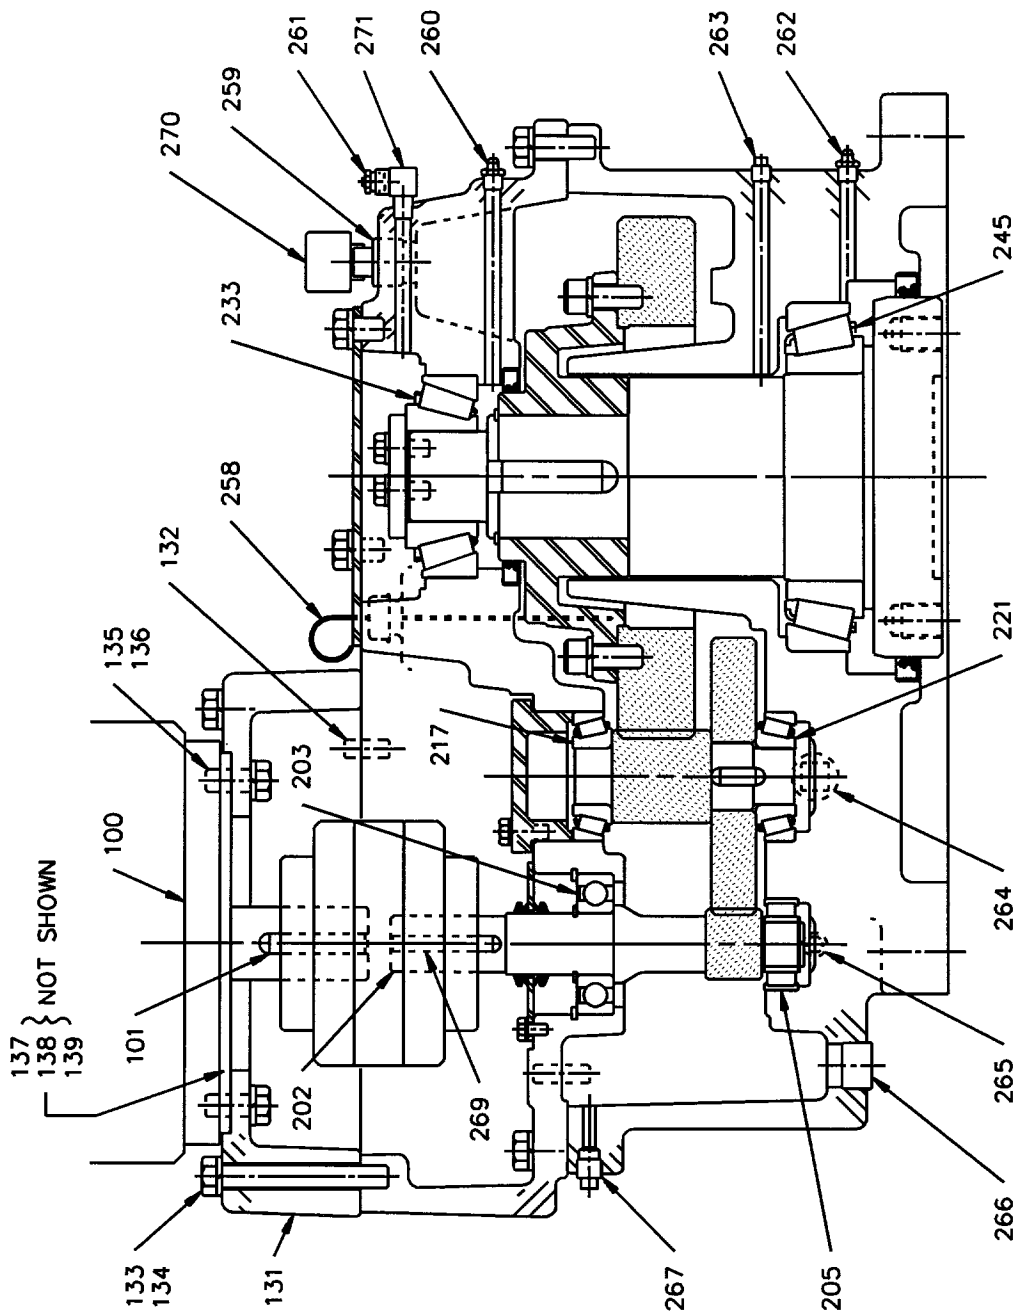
GT Double Reduction Gear Drive, Size 1,2,3,4
